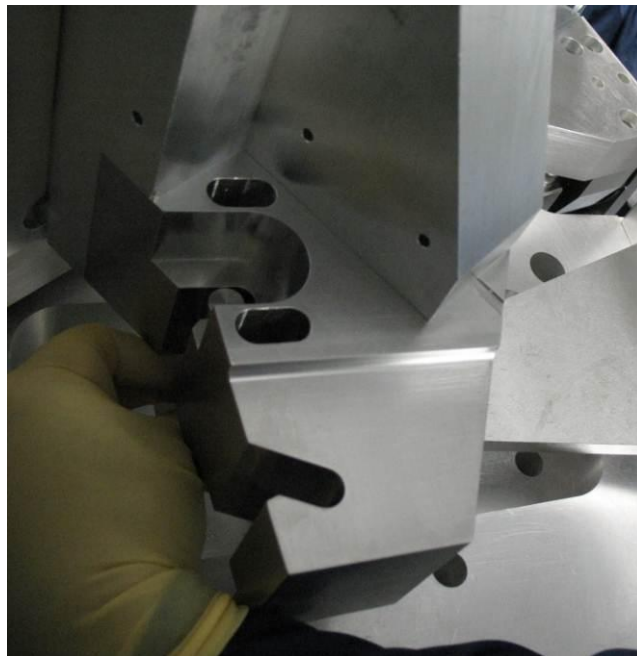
Inserting Alignment Rod for D0902502 Stage 1-2 Spring Blade
